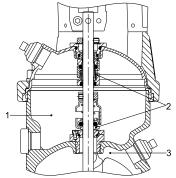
CR 1s to 5 with back-to-back seal arrangement
